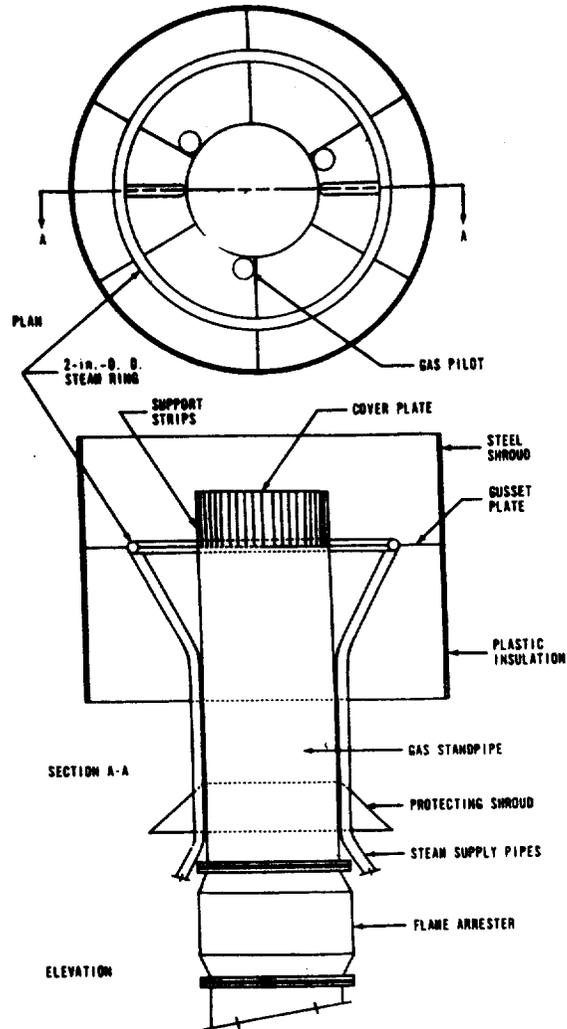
Detail of Sinclair flare burner, plan and elevation (Decker, 1950).
